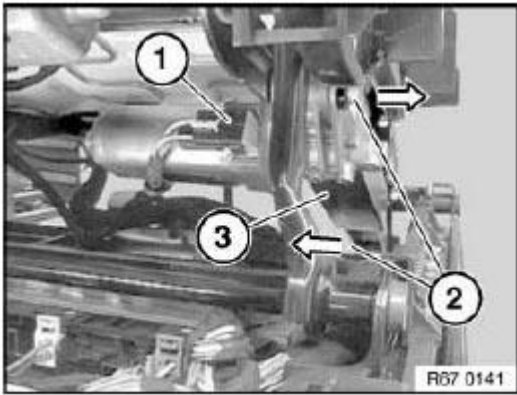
Identifying Plug Connection, Screws And Seat Height Adjustment
